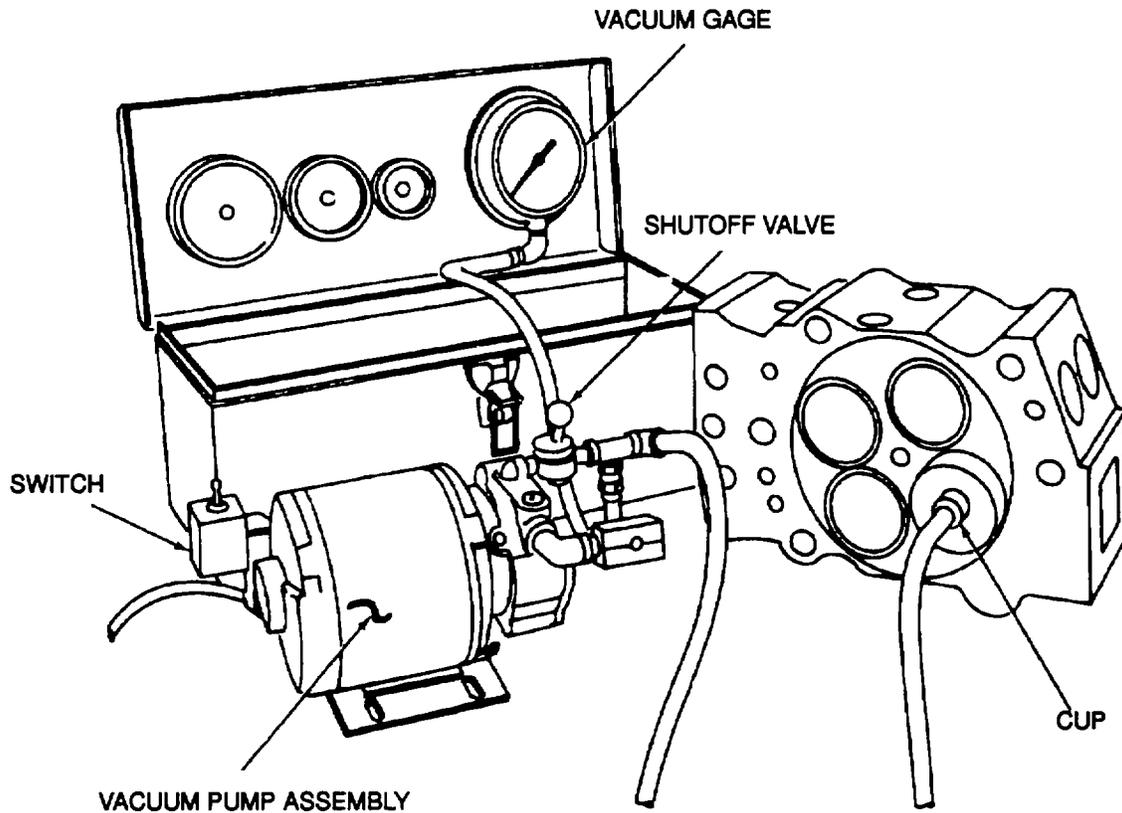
Vacuum Testing Valve Seats Using ST-1257
